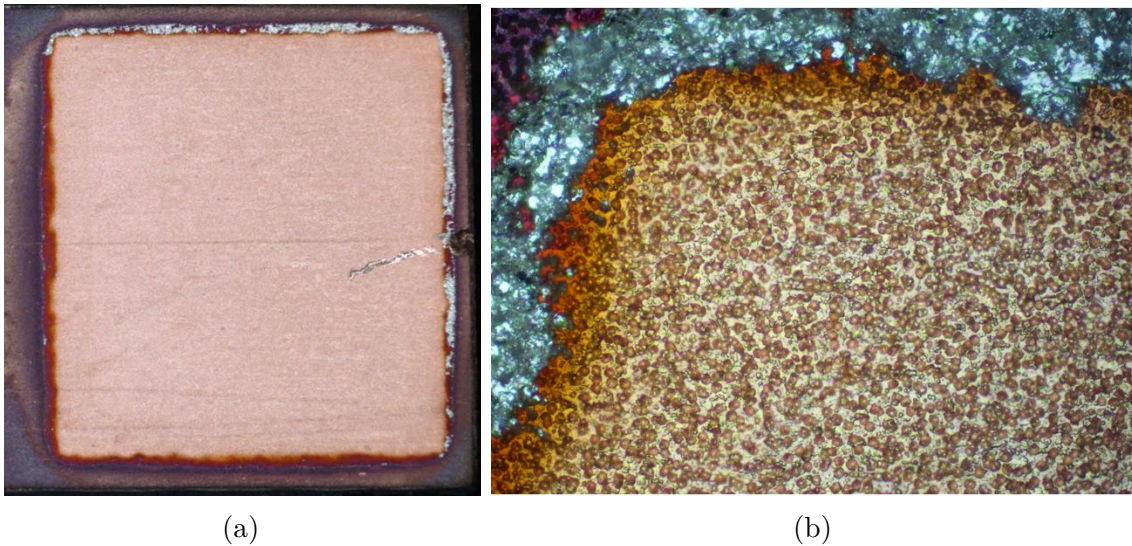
(a) & (b) Bald die pad under ASIC, suggests adhesion failure.
